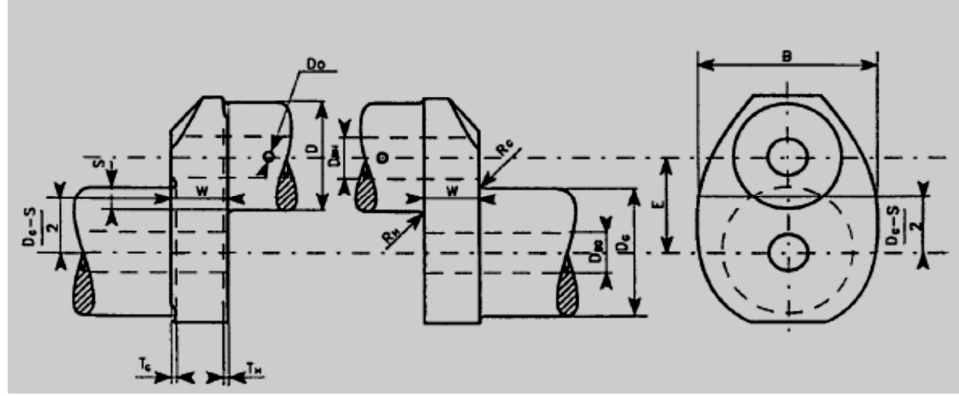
Crankshaft dimensions related to stress concentration factor at the fillet region [67].
